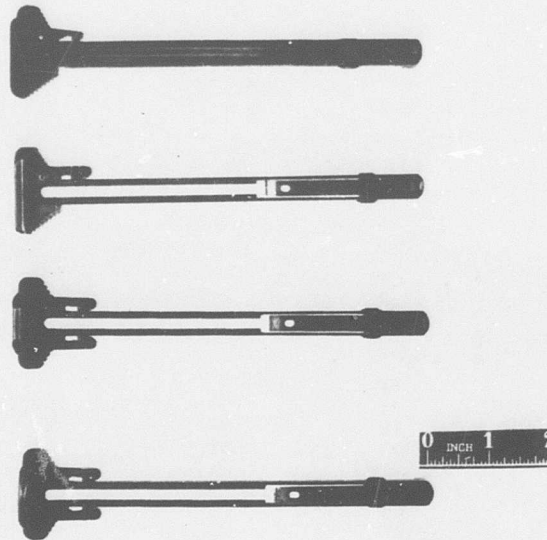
Charging Handle Assemblies. Top to Bottom: Standard Aluminum Model; Redesigned Steel Model with One Latch; Redesigned Steel Model with Two Latches; Redesigned Steel Model with Two Latches and Elongated Carrier Key Channel. Note Length of Channel Compared to Latch Pivot Pins.
